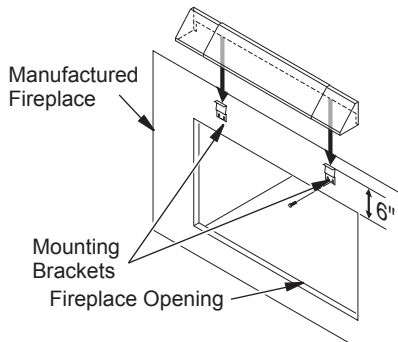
Installing Hood Above Opening on Manufactured Fireplace
